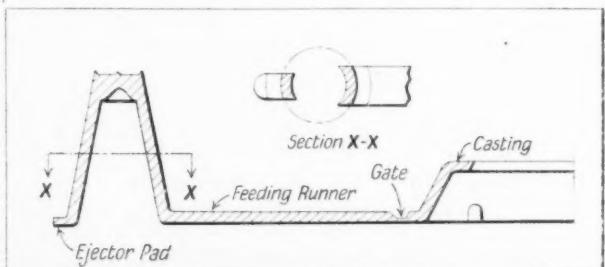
Sections of the Divided Sprue from the Tool Shown in Fig. 13
